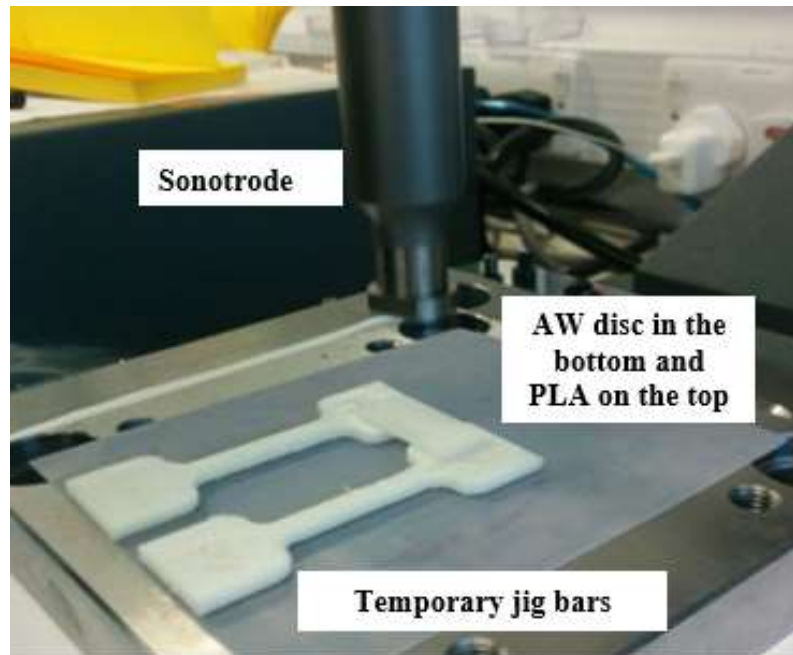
3. Preliminary study set-up for welding PLA-AW samples. The AW disc is positioned in between two bars to constrain the sample during the welding process, then the PLA pad is positioned on the top.
